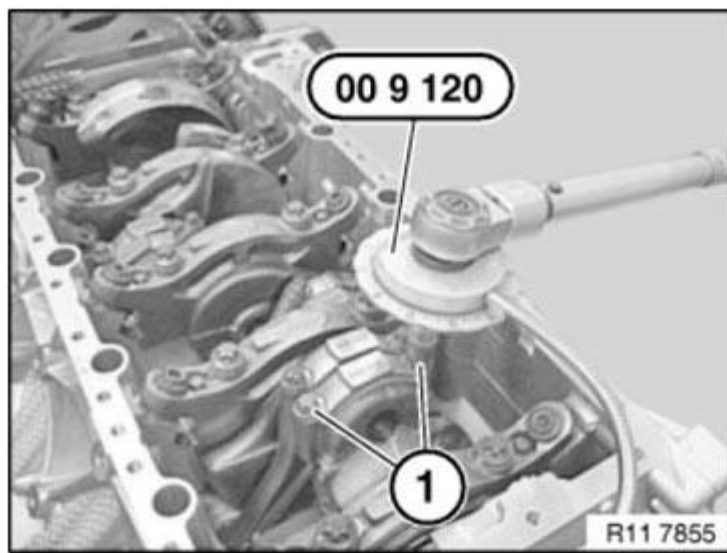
Securing Connecting Rod Bolts With Special Tool 00 9 120
